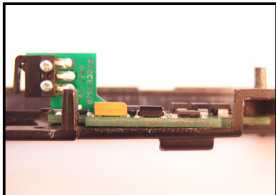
Processor unit board shouldn't be bend in the gearbox
